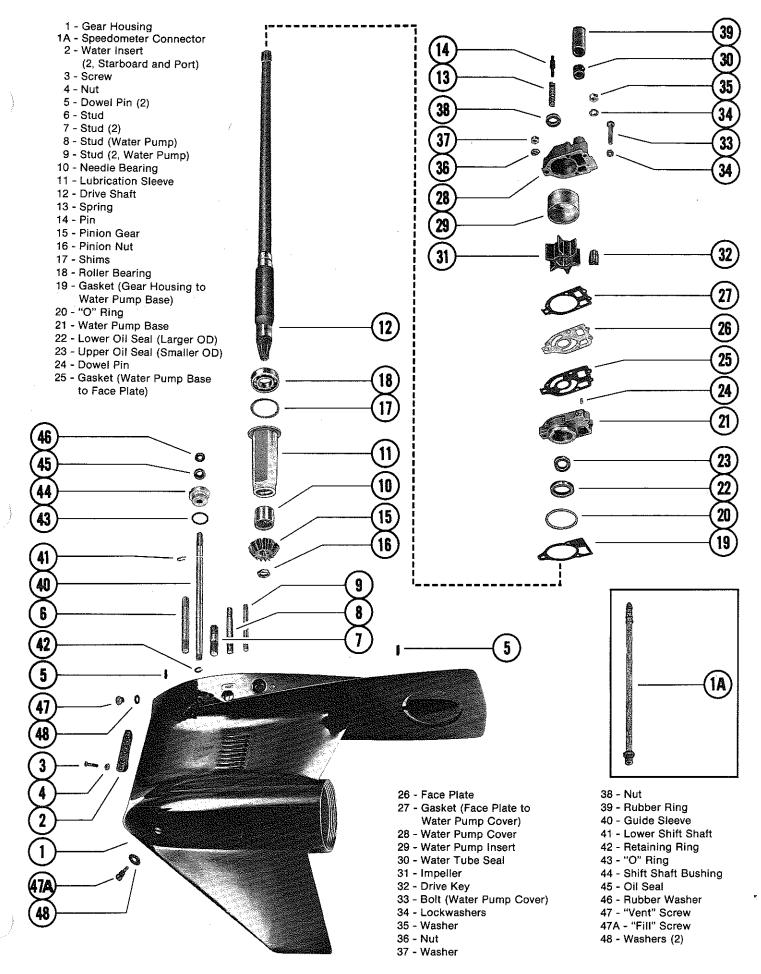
A. Cam-Shift Gear Housing Assembly (Drive Shaft and Water Pump Components)
